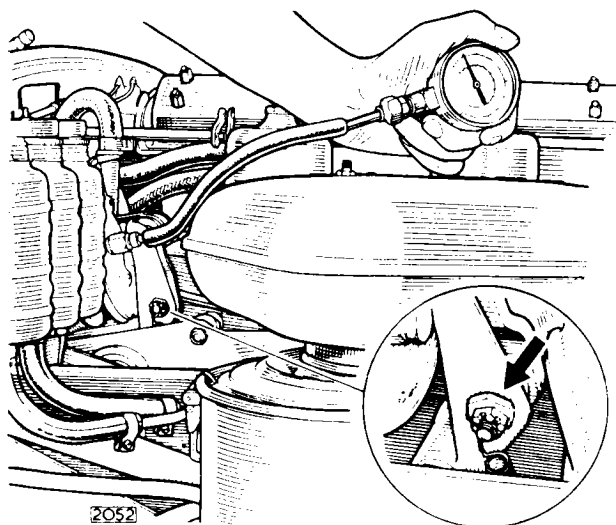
Checking the servo with a vacuum gauge, Churchill tool No. J12—Gauge and Adaptor J12.1—Pipe and Adaptor, inset shows eccentric adjusting nut
